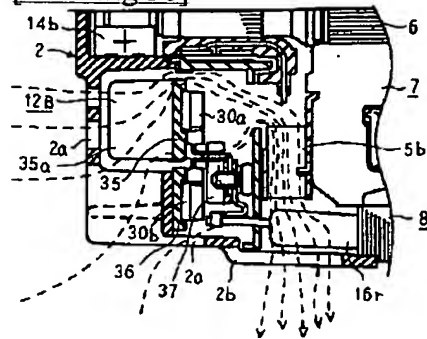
It is the sectional view showing the conventional rectifier of further others.
